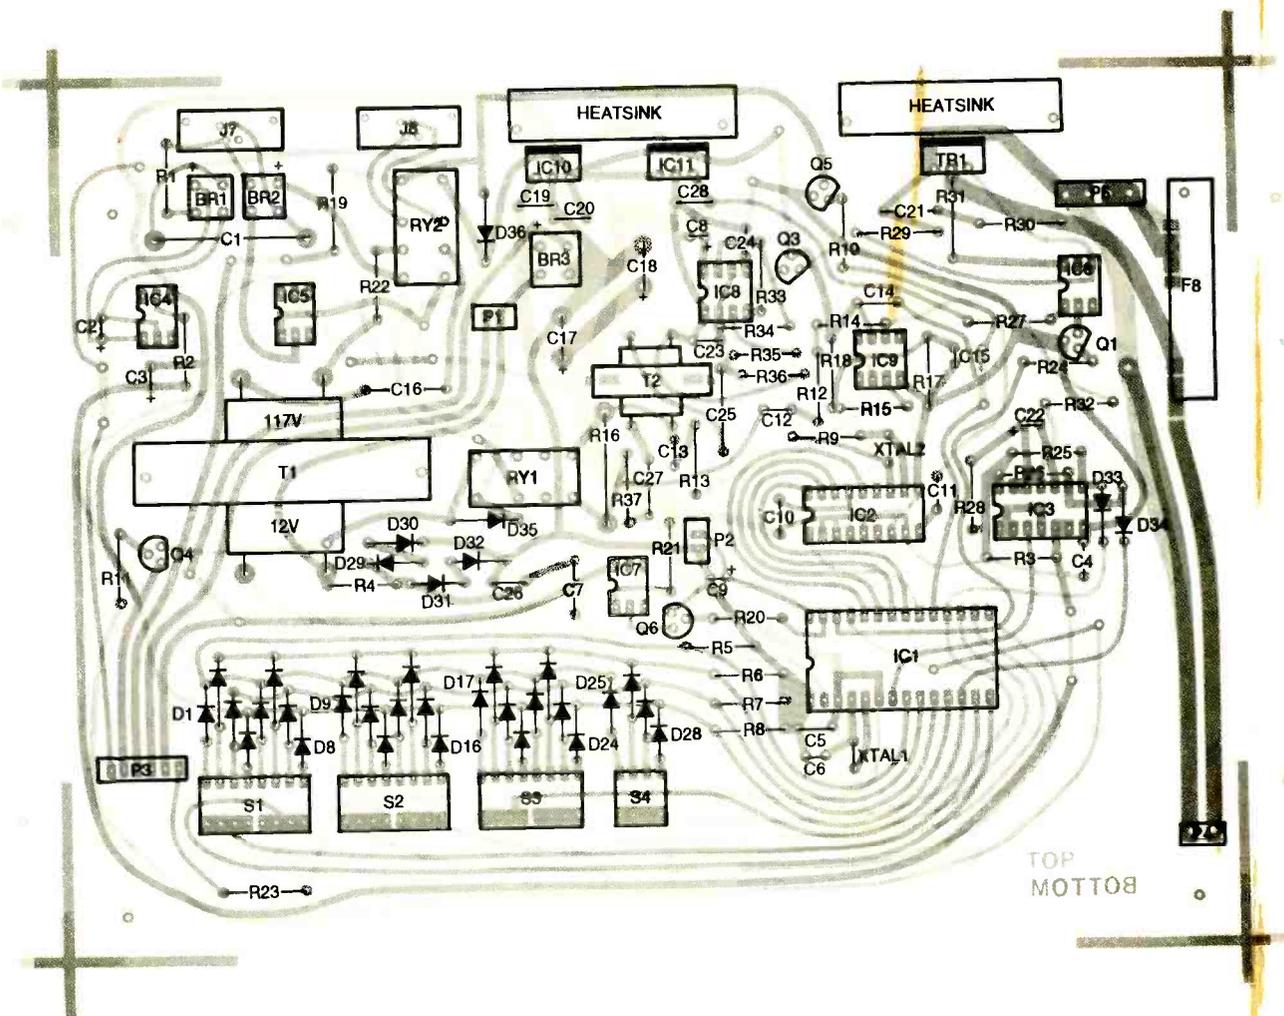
Mount all components as shown here. The heatsinks are simple L-brackets attached with short 6-32 machine screws and nuts. Use heatsink grease to attach the regulators and Triac.
